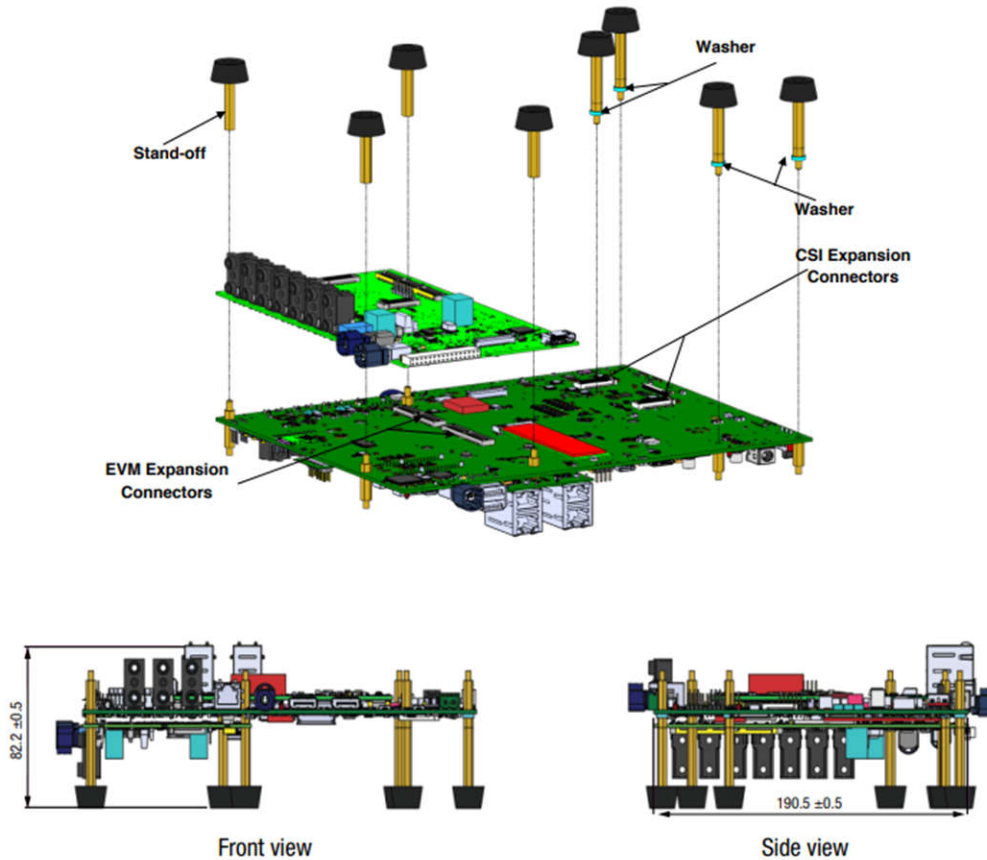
Installing the Infotainment Expansion Board Onto the Common Processor Board
